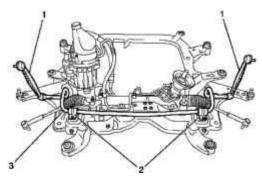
Stabilizer front suspension complete with subframe: 1 - turning the lever, 2 - retaining brackets, 3 - stabilizer
